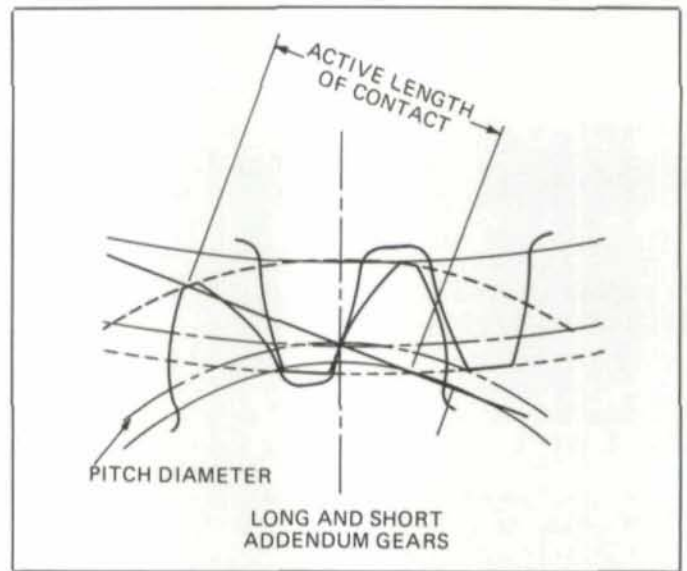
Long and Short Addendum Gears minimize the problems where the pinion is very small compared to the mating gear.
